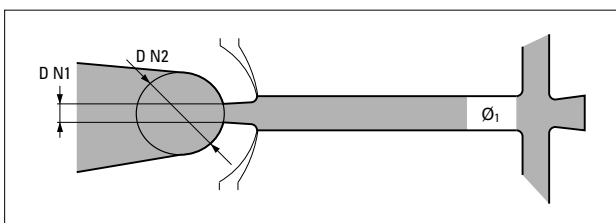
Sprue and nozzle design often used with DELRIN®. The dimensions are linked with the dimensions of the part and of the runners
